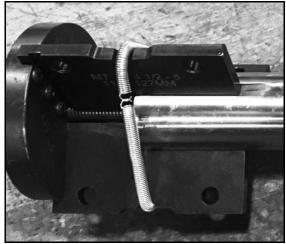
INSTALLATION OF THE WEDGE GUIDE ASSEMBLY
